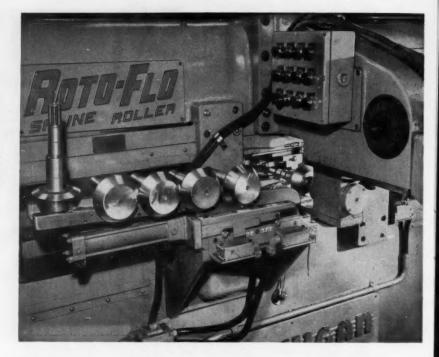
Rear-axie drive pinions are automatically loaded from a magazine for cold roll-forming twentyeight serrations 1.820 inches long.
